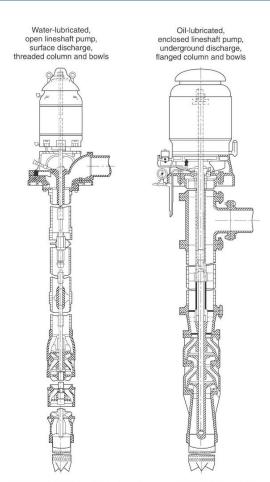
Water-Lubricated and Oil-Lubricated Shaft
